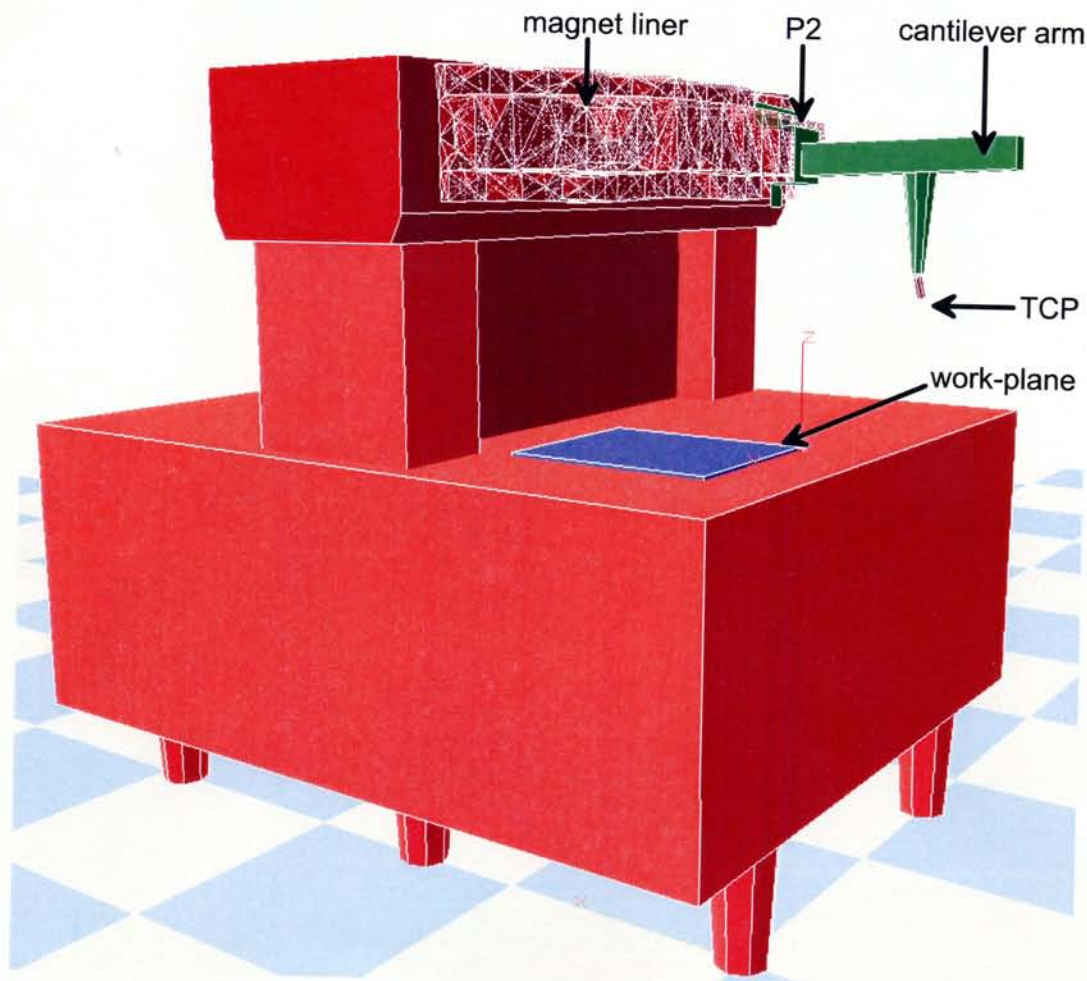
Principle lay-out of the machine tool in SIMPACK.
